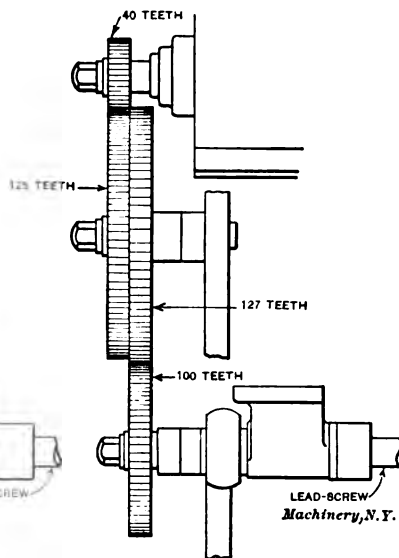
Cutting an English Thread with a Metric Lead-screw
